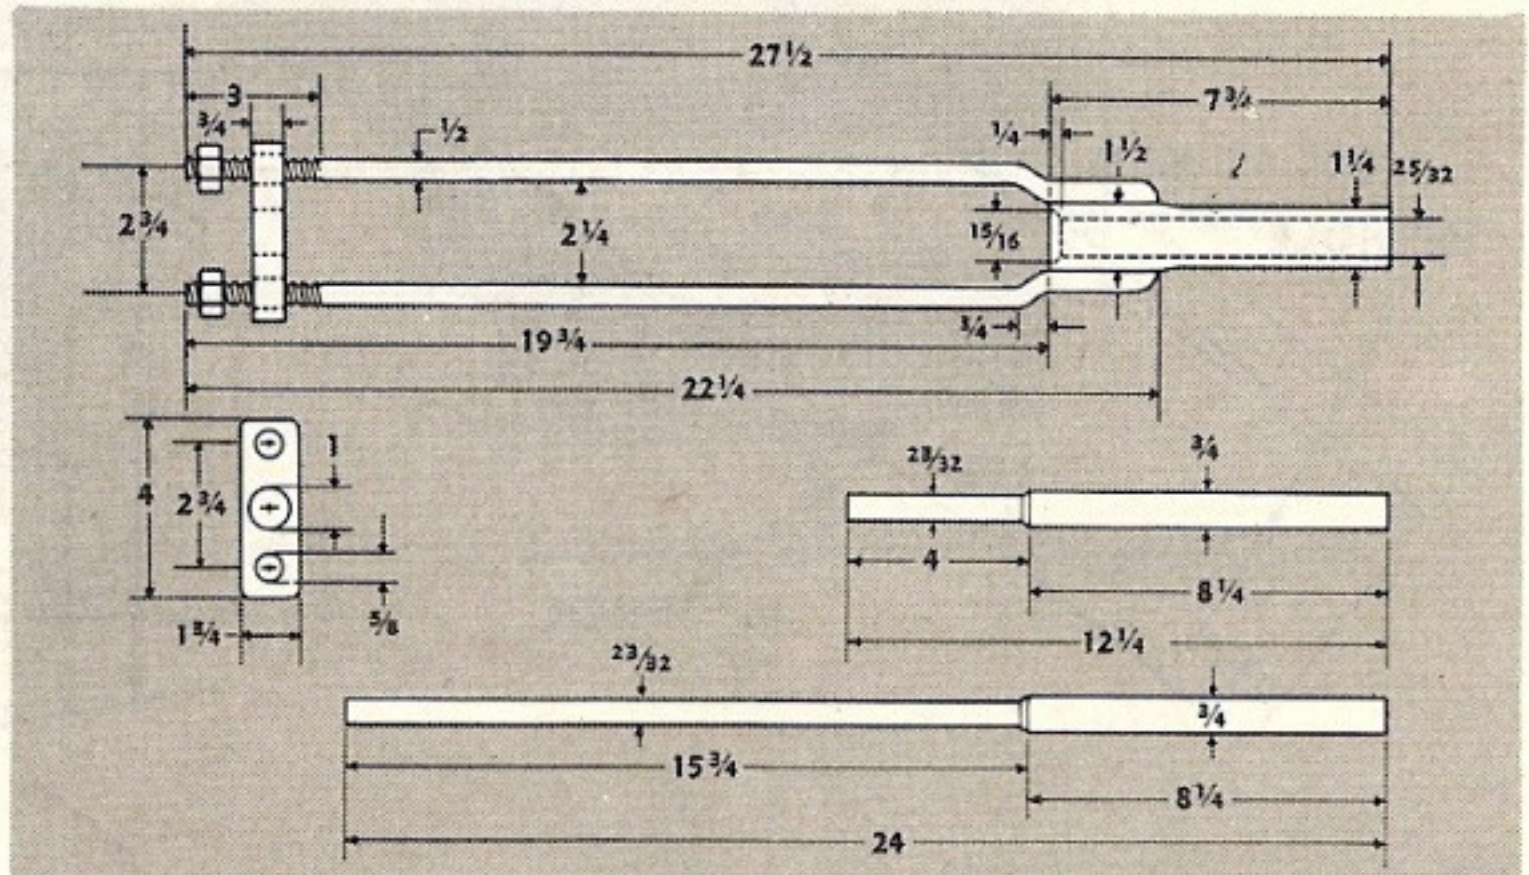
With these dimensions plus a lathe, drill, welding equipment, and some scrap metal, you're set to pop those pins.
